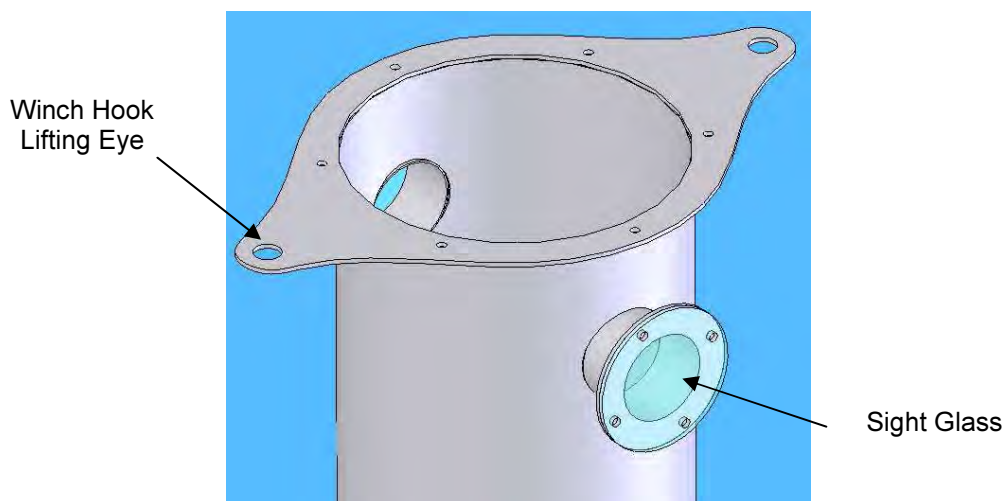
Solidworks drawing of the top flange and holes for the inspection ports of Section D of the single cell baghouse shell
